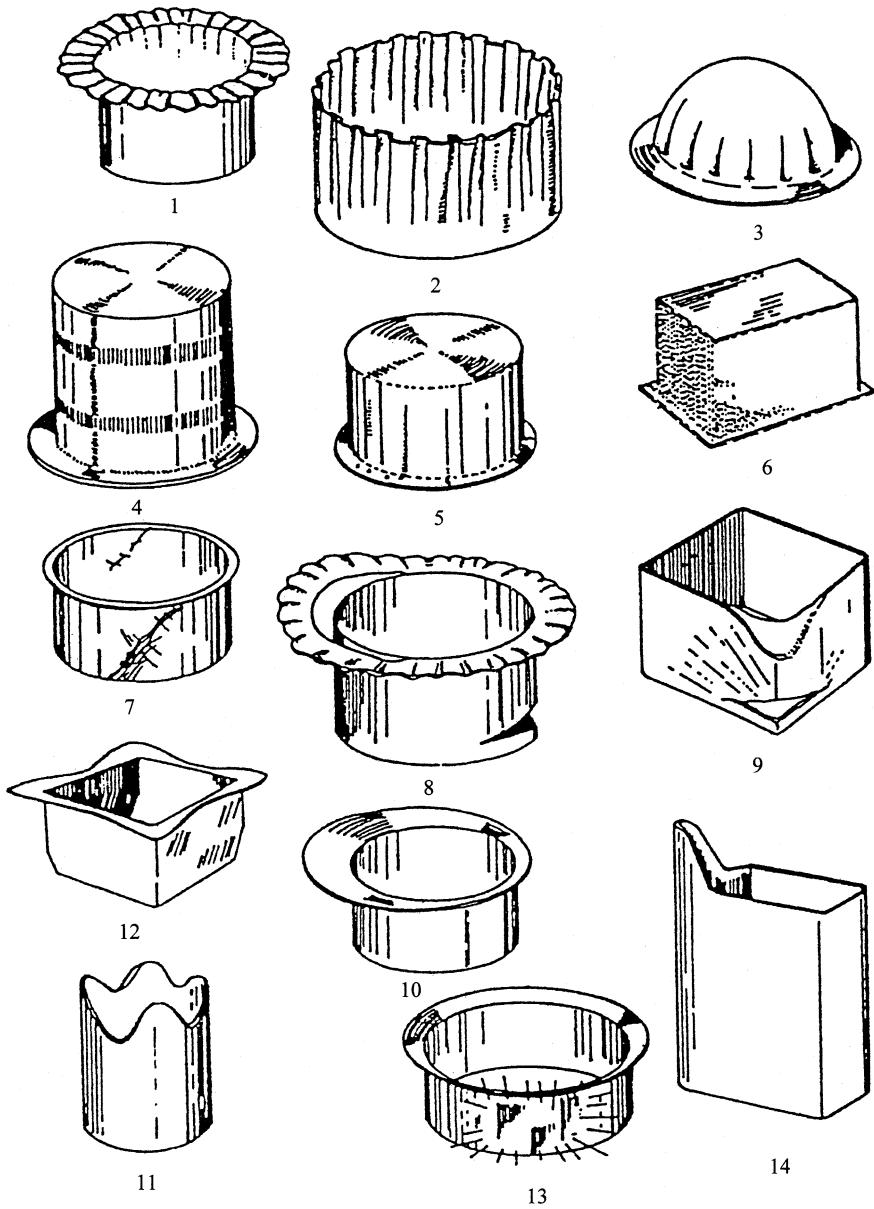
Defects in deep-drawing: 1—flange wrinkling; 2—wall wrinkling; 3—part wrinkling; 4—ring prints; 5—traces; 6—orange skin; 7—Lüders strips; 8—bottom fracture; 9—corner fracture; 10, 11, 12—folding; 13, 14—corner folding [1]
